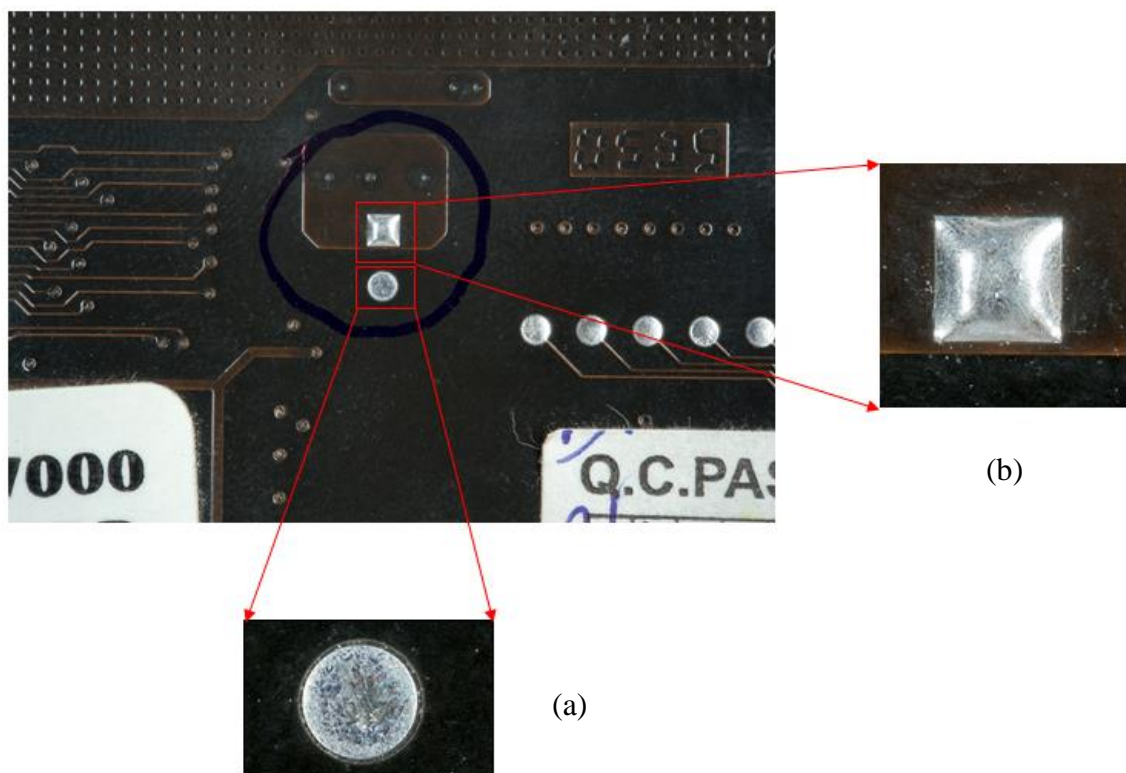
PCB (a) Circular solder joint (b) Square solder joint
